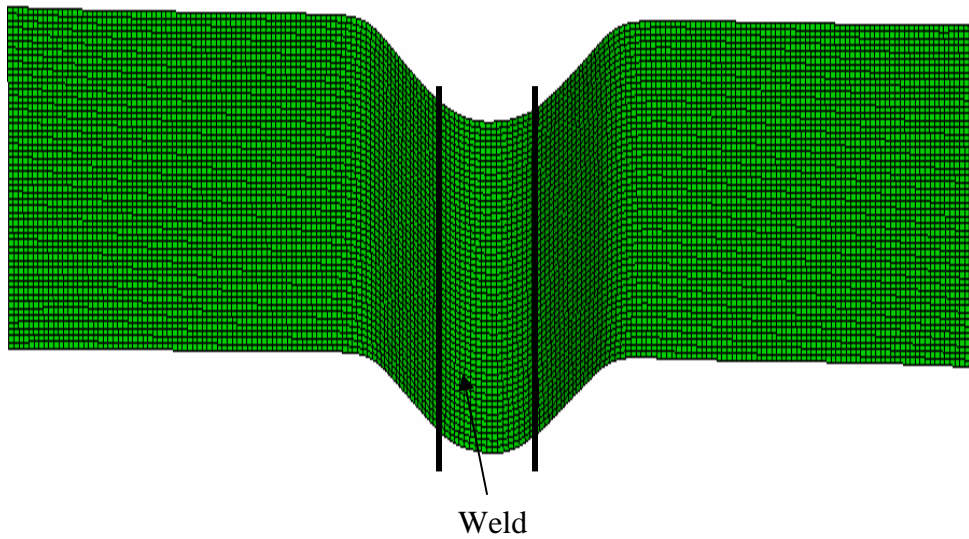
Deformed Tailor Welded Blank after stretch forming process
